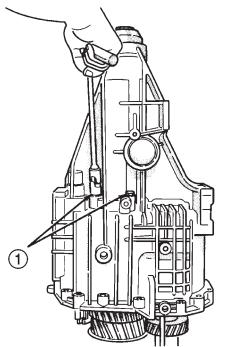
Geartrain And Housing Mounted On Fixture Tool
